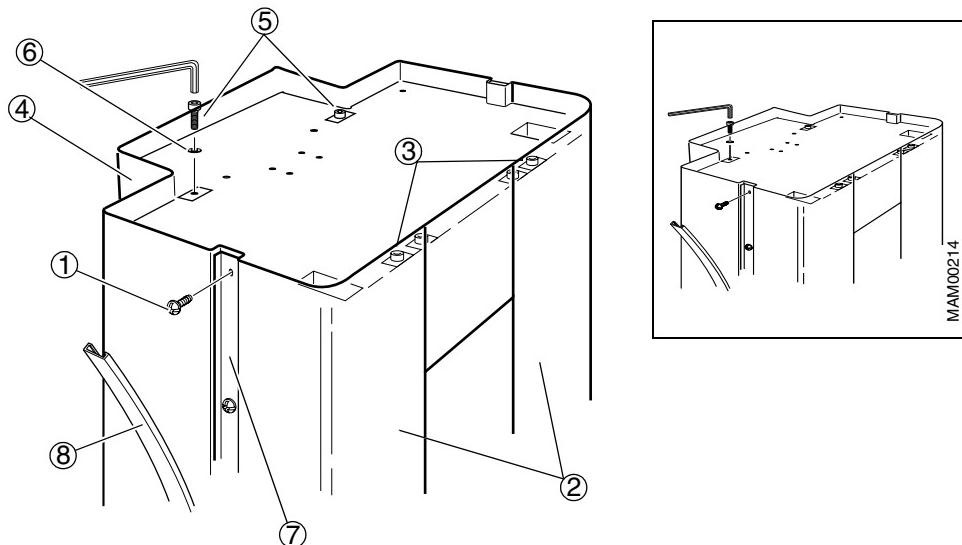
Mounting the stand covers on a stand with single rear cover.
